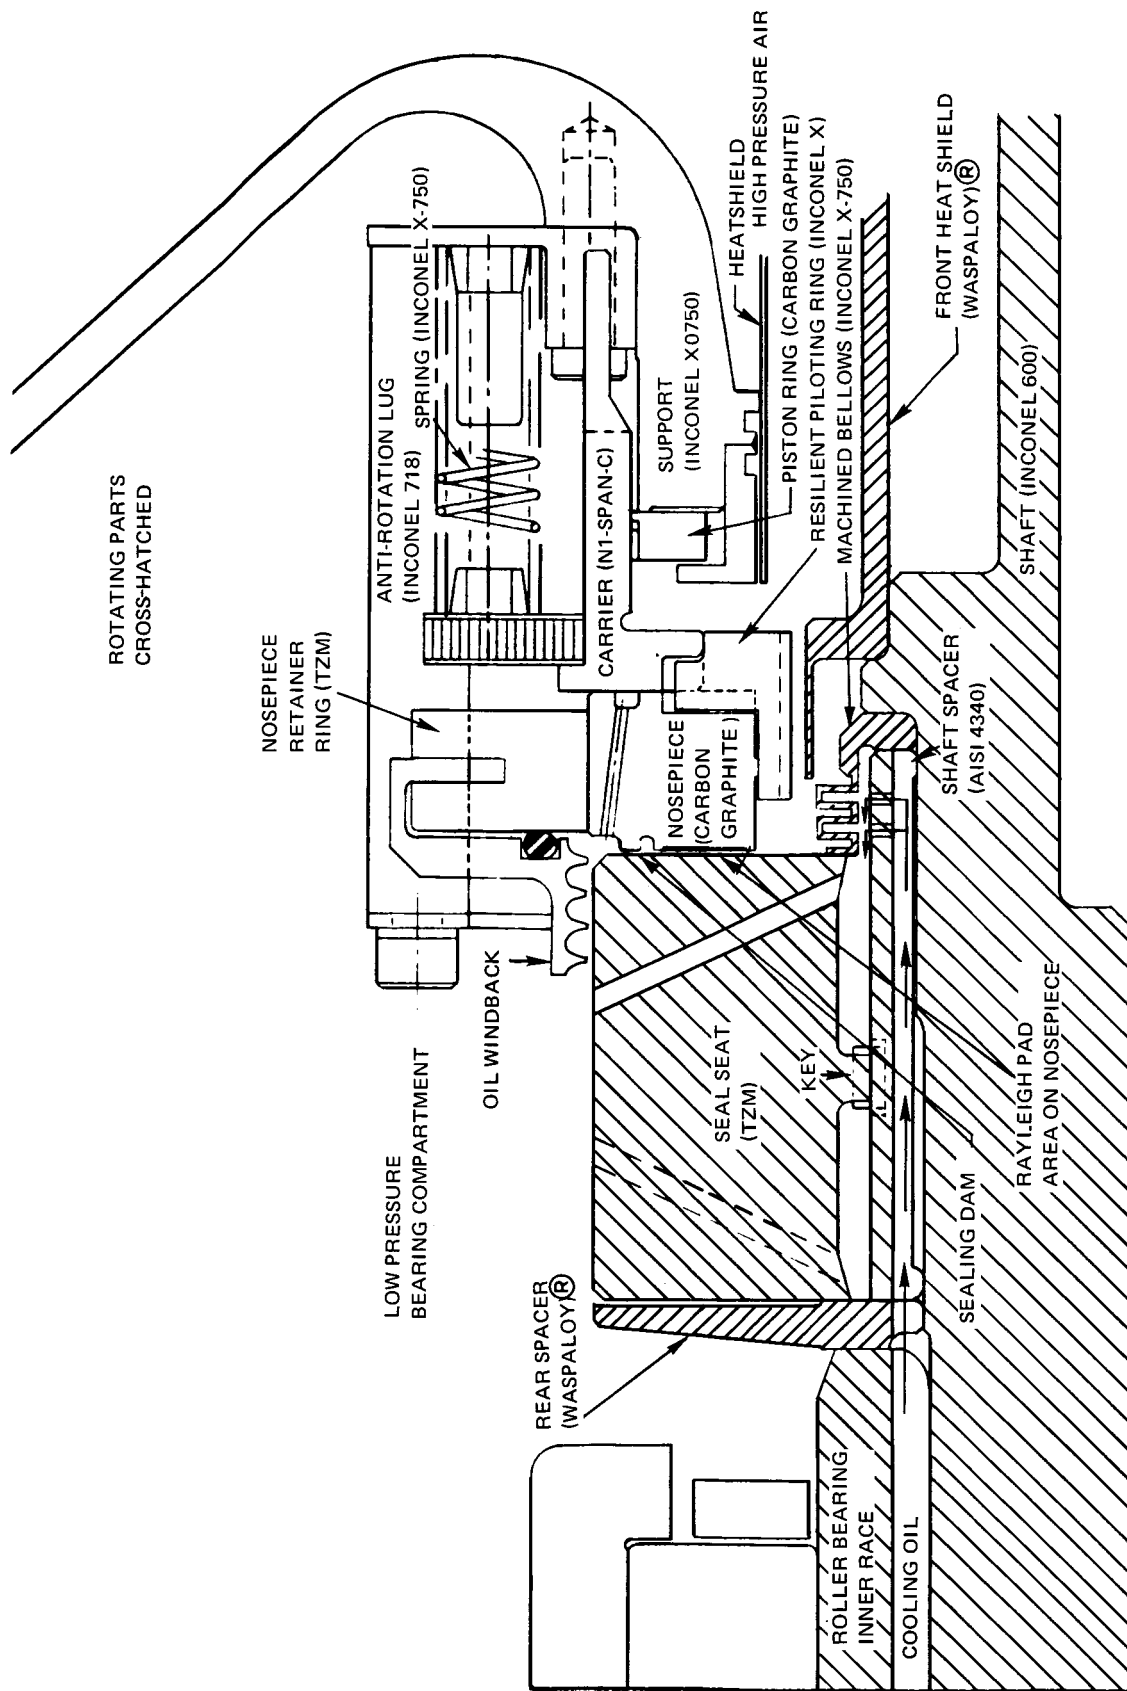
Initial Hub and Seal Assembly for Elevated Temperature Endurance Testing
